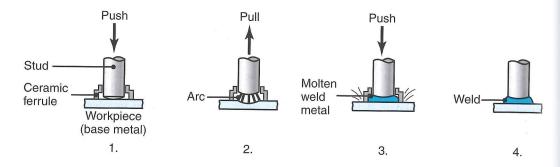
Sequence of operations in stud welding, commonly used for welding bars, threaded rods, and various fasteners onto metal plates.
